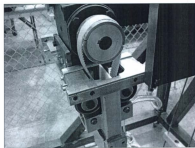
Gearbox mounted into preliminary position prior to carriage mounting
